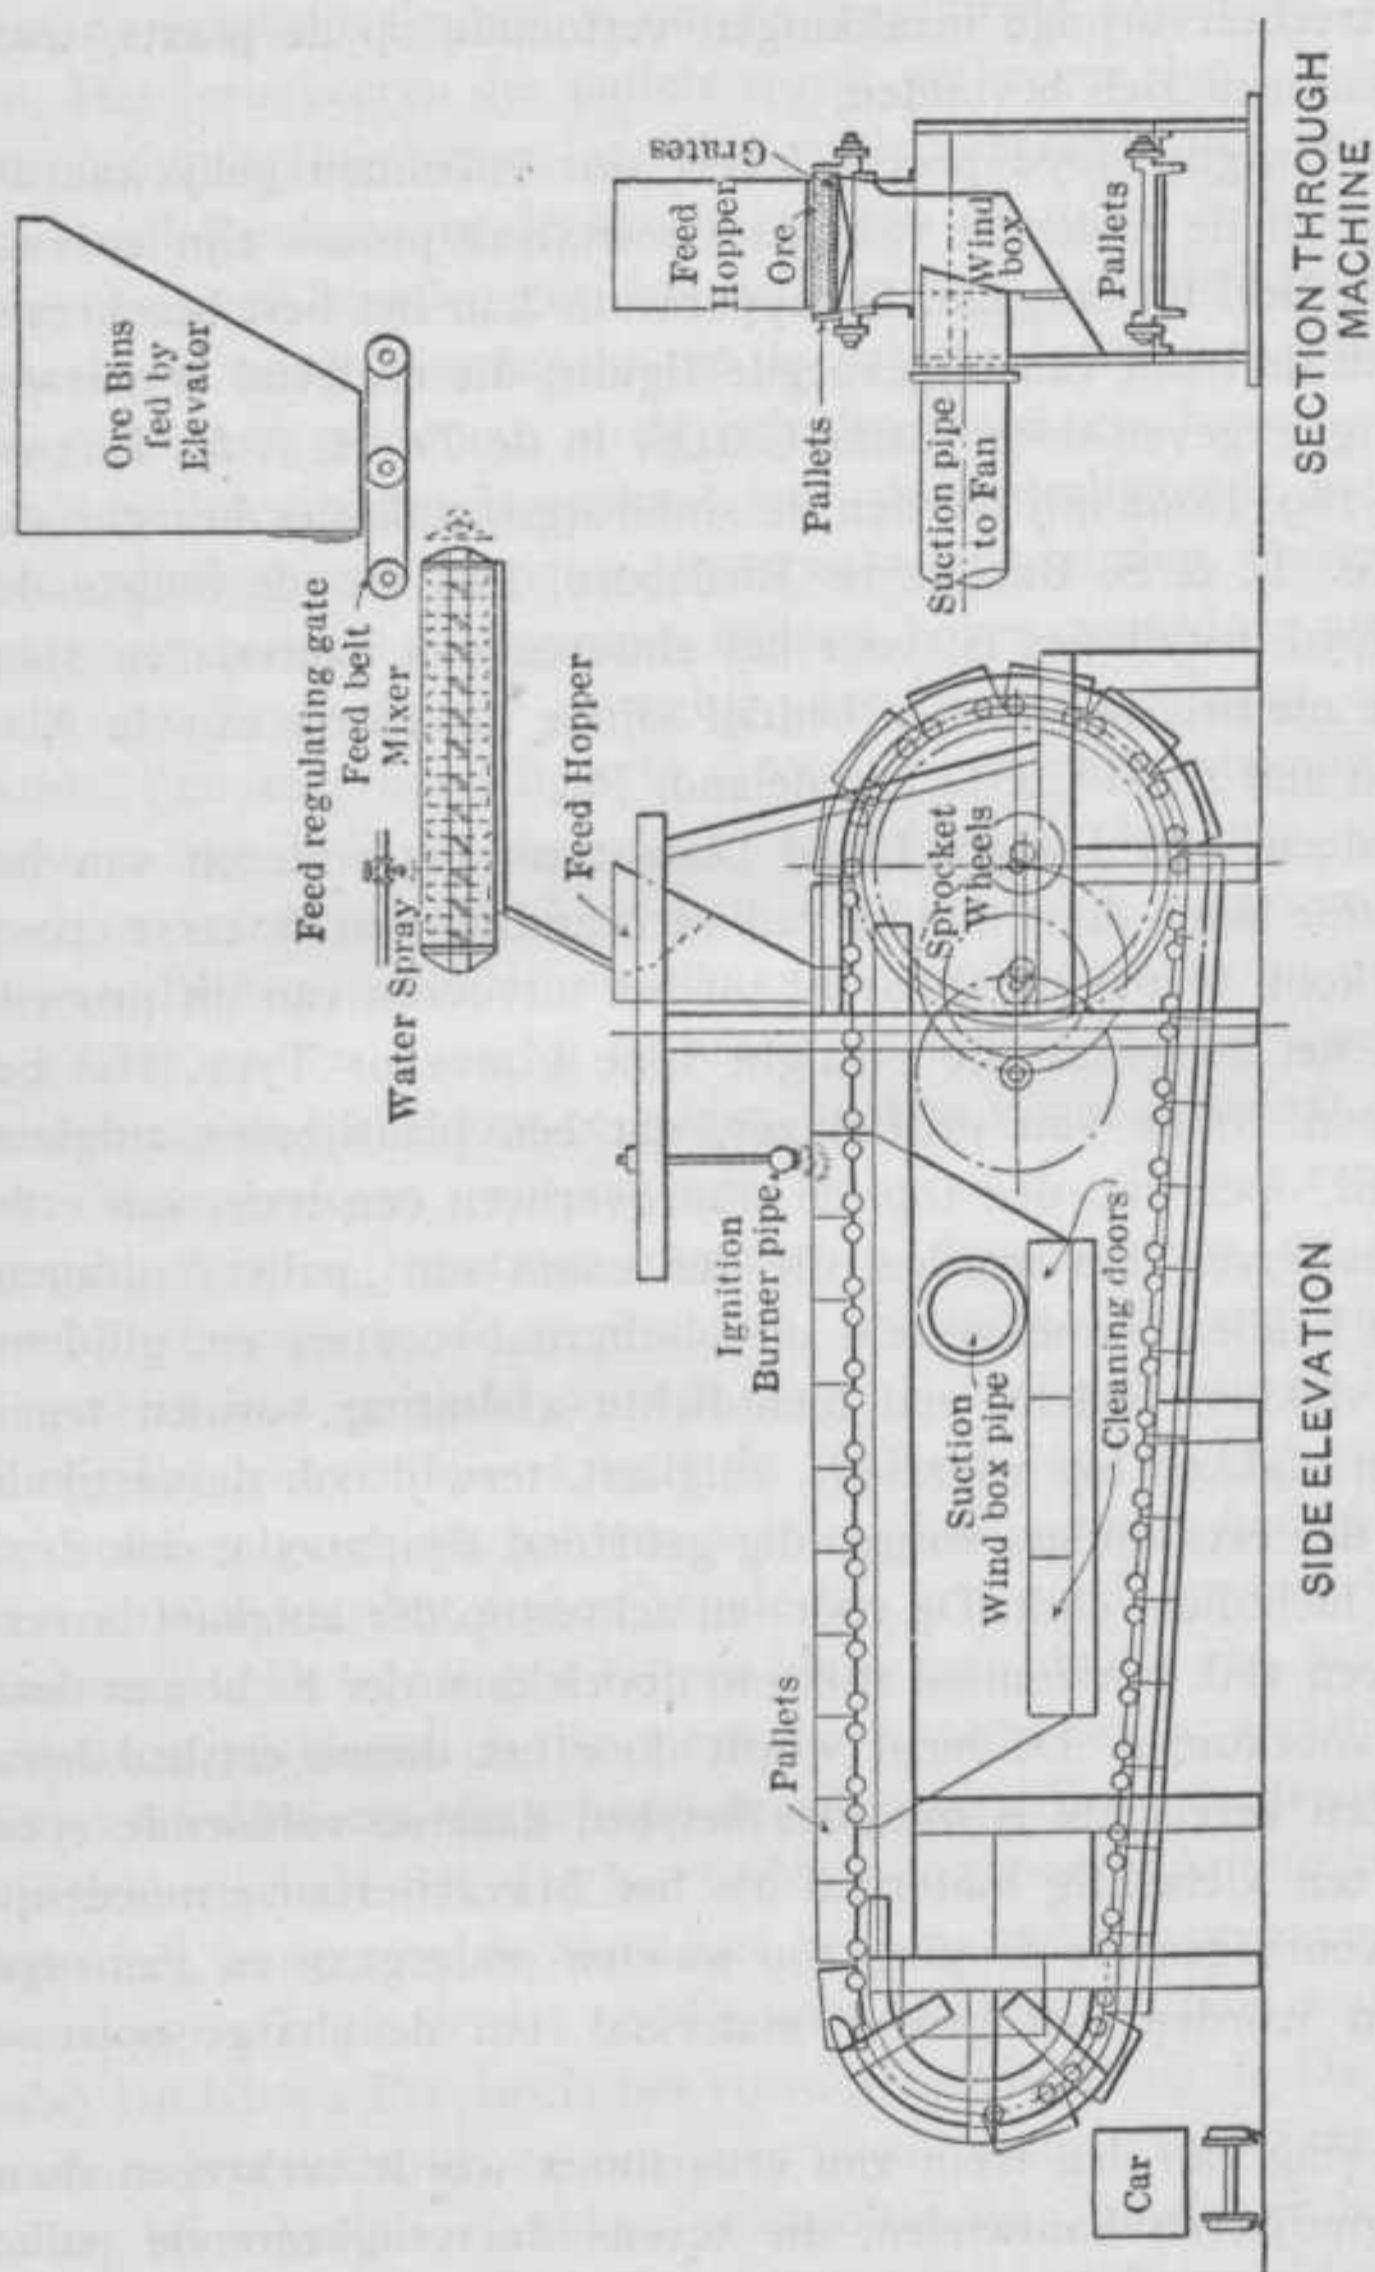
Dwight and Lloyd Sintering-machine; Conveyor type.
